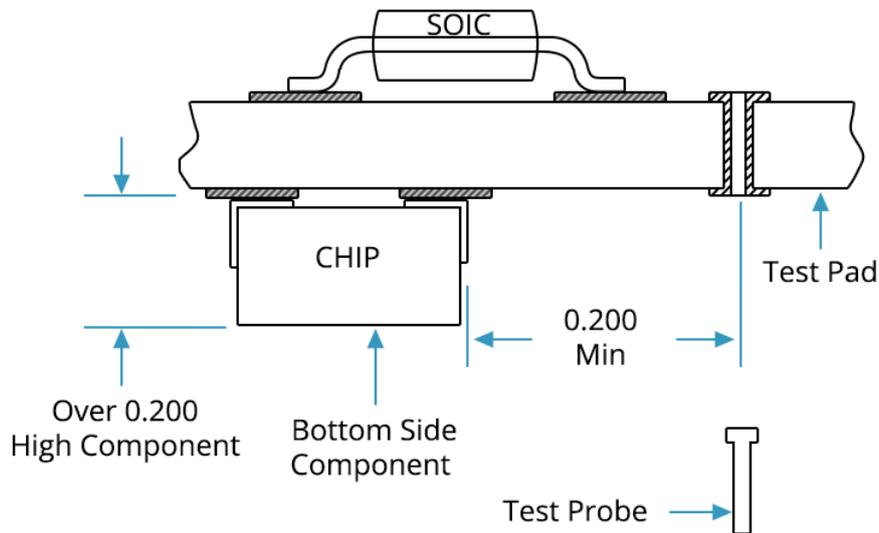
Test Pad to Component Spacing for Components Over .200" high
